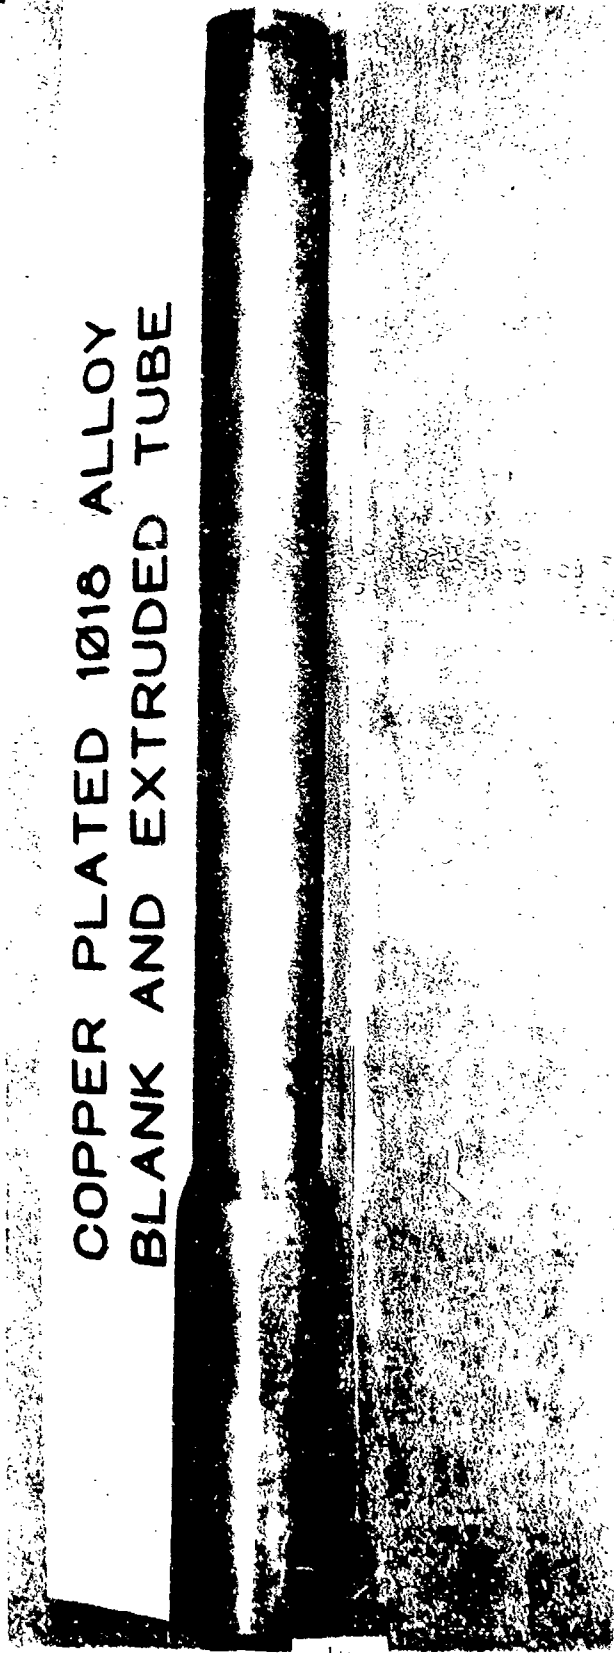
Cu Plated AISI 1018 Alloy Blank (left) and Extruded Tube on the Right
